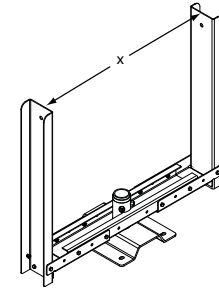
Fan Width Dimension For Ceiling-Mount Bracket
